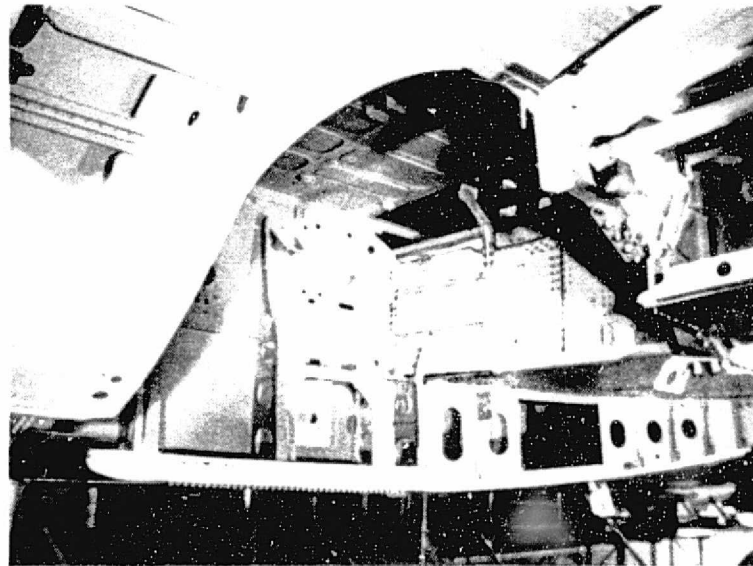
FUSELAGE KEEL AT WING JOINING
